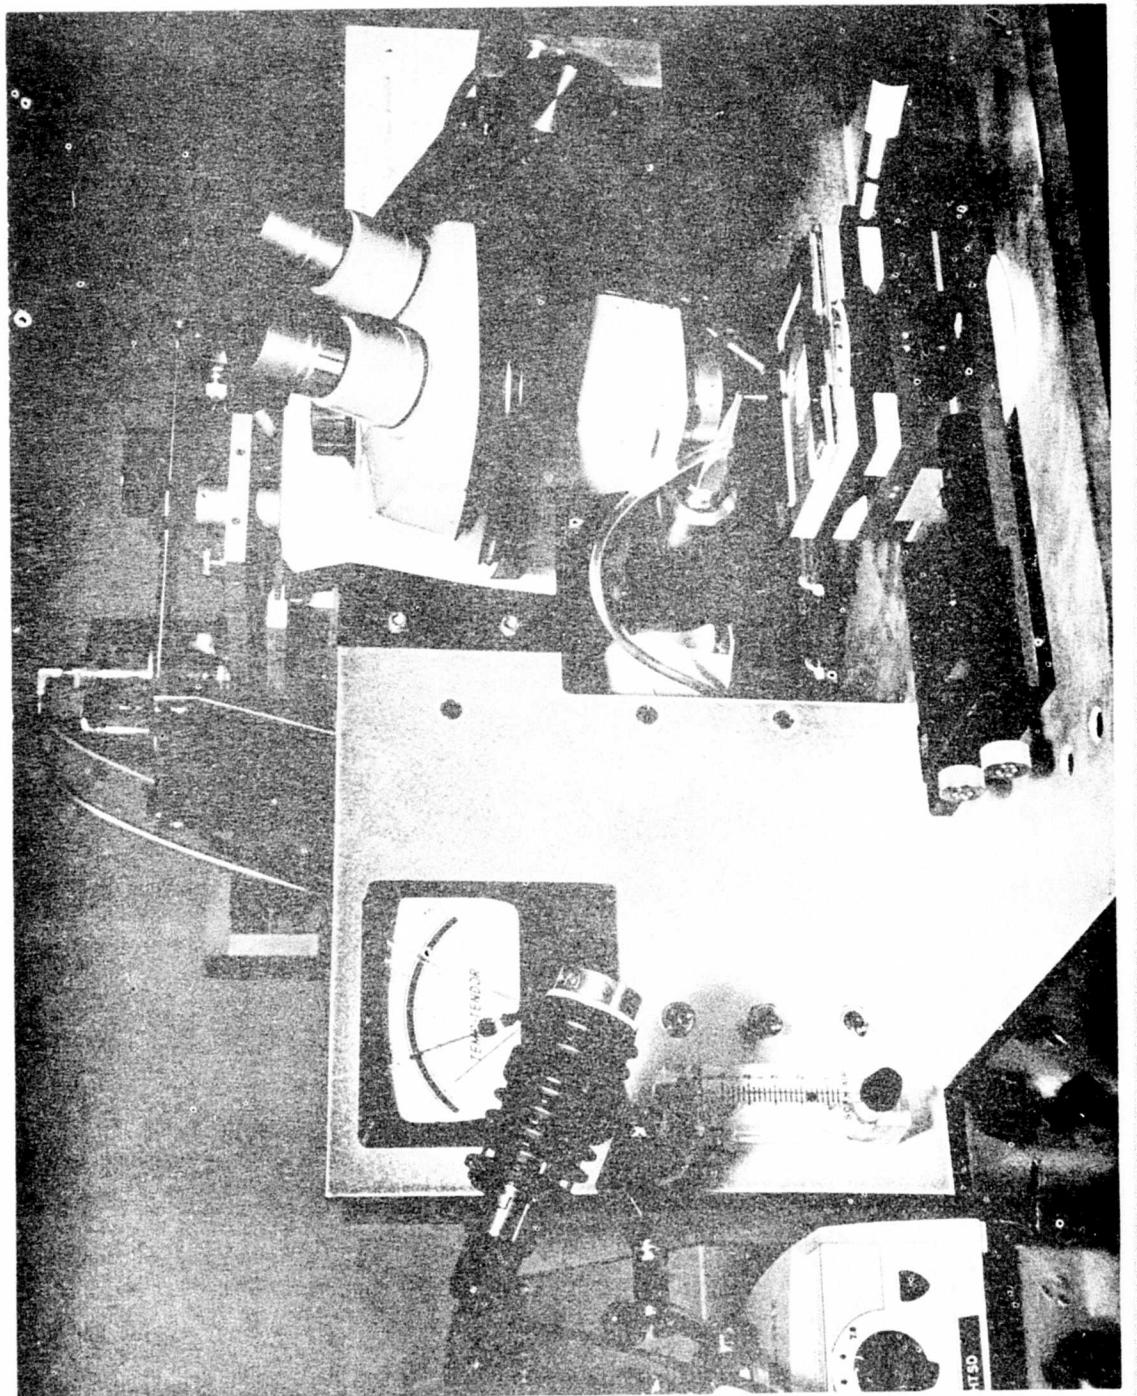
Aluminum Bump Ultrasonic Bonder - A Part of the IMATS
